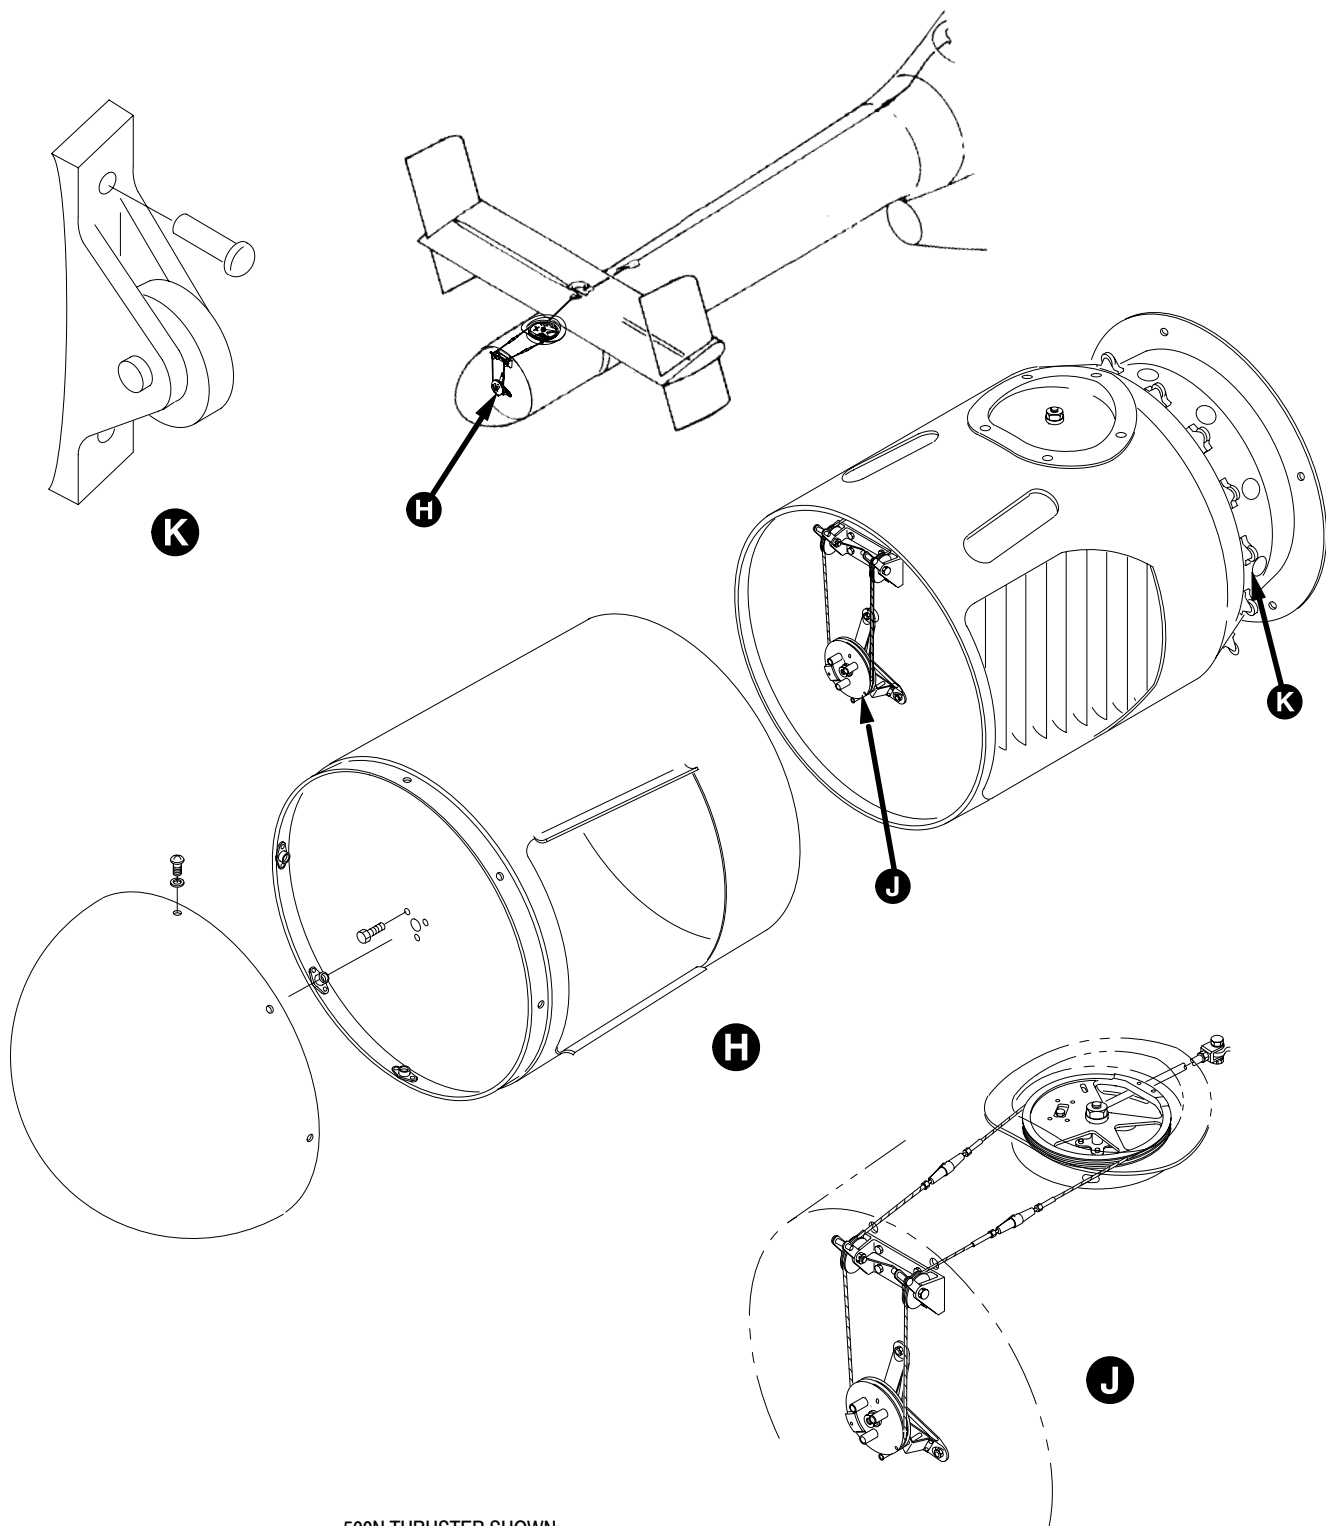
Tailboom Assembly (Sheet 2 of 3)
